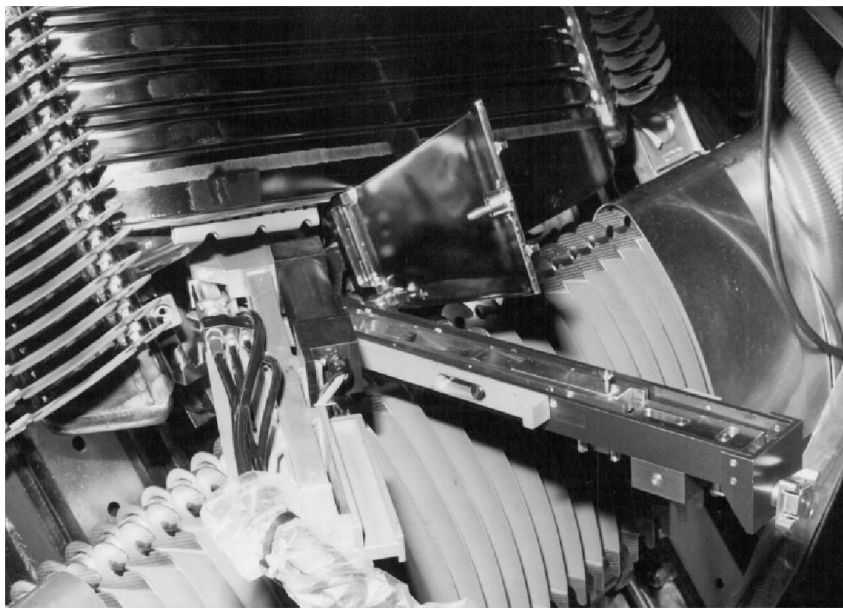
Welding tool (see also figure 27) positioned at the Ø 91 mm port above the belt limiter
